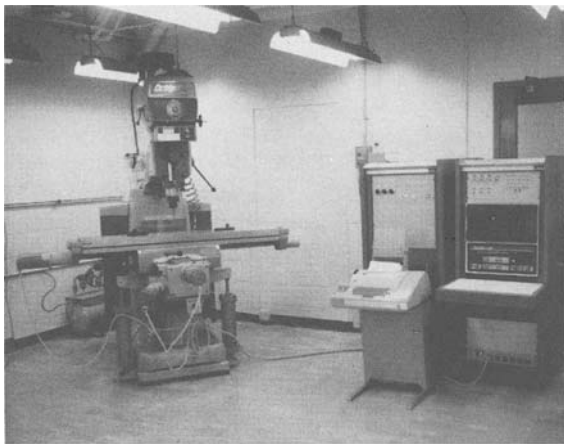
CNC machining system consisting of a minicomputer, high-speed paper tape reader/punch, teletype-writer, manual control console and step-motor drivers and the milling machine.
